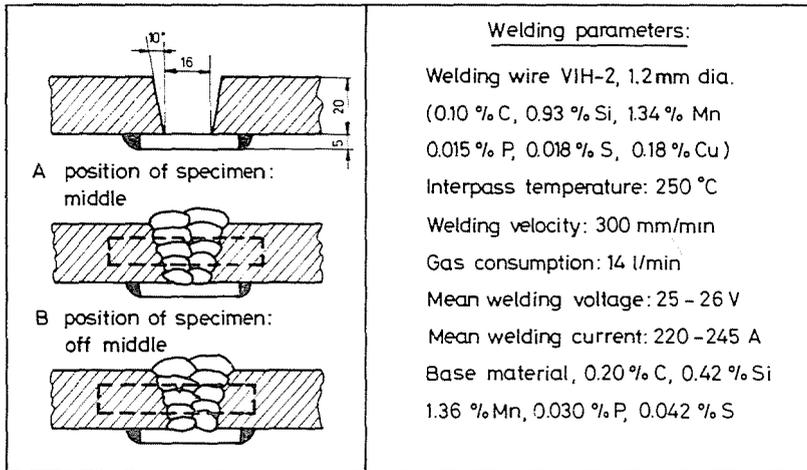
MAG-welding: Preparation, position of specimens and welding parameters
